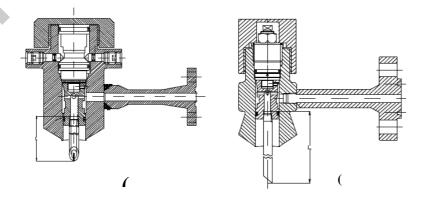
Hydraulic (1) and Mechanical (2) access fittings (Flanged type).
